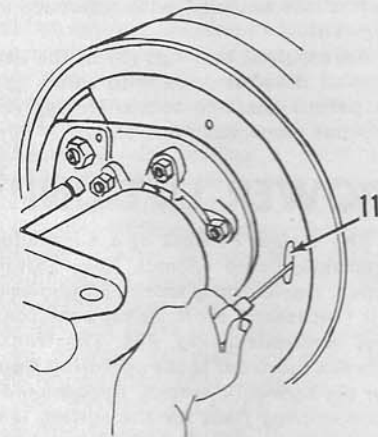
TO20, and TO30, showing location and method of adjusting brakes with brake shoe adjusting screw star wheel (11). View shows right brake back plate.
